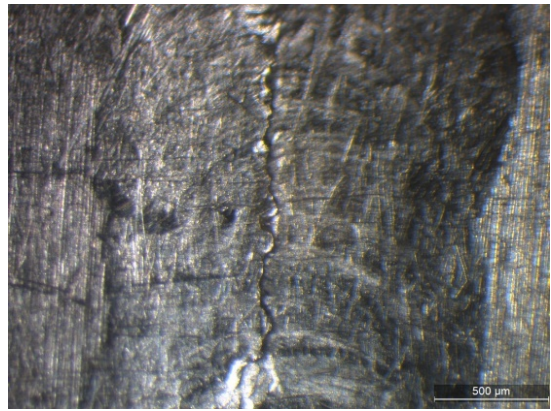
Detail of the weld area for the RHU clad impacted twice (stereomicroscopy).
